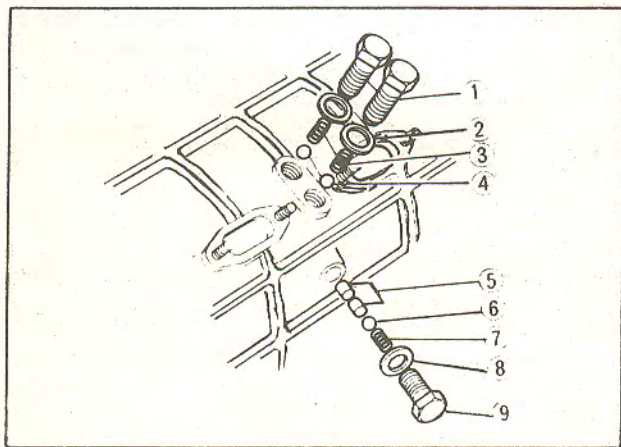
The location of the spring cap bolts on the gearbox.
